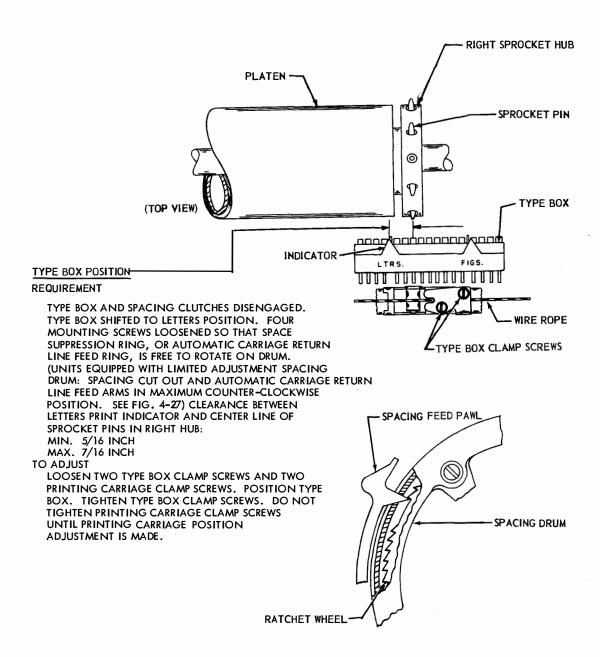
TYPING UNIT, PLATEN AND PRINTING MECHANISM
